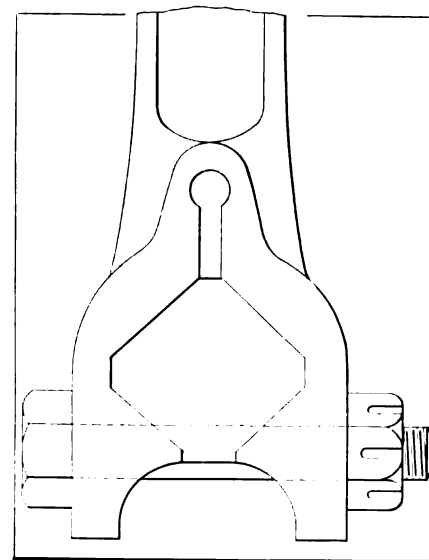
Method of attaching gear or brake lever so that it will not slip on the shaft
